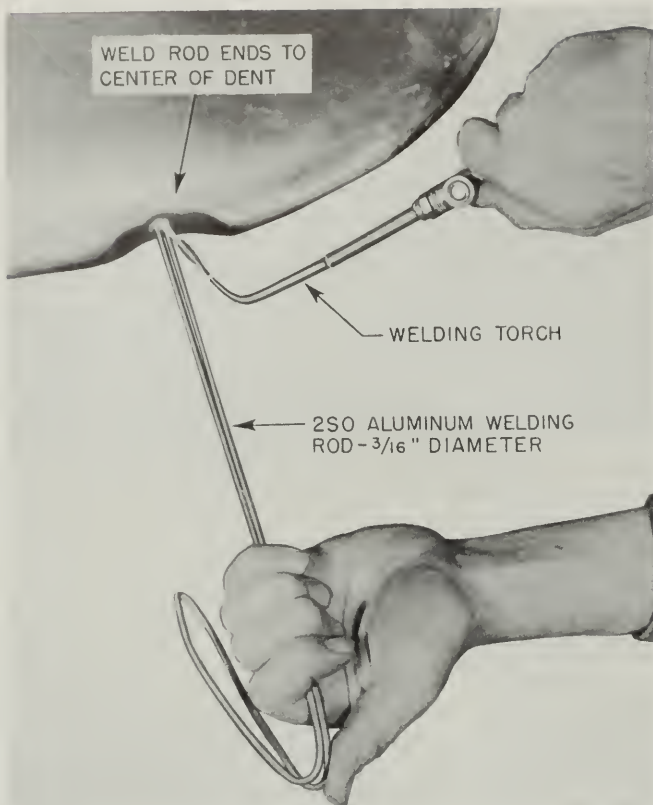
Welding a Rod to a Dent in the Horizontal Stabilizer Tip
